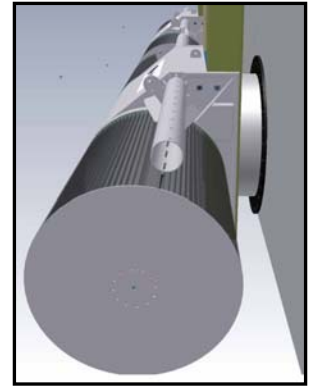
Schematic of the Removable Rotating Drum Screen.
